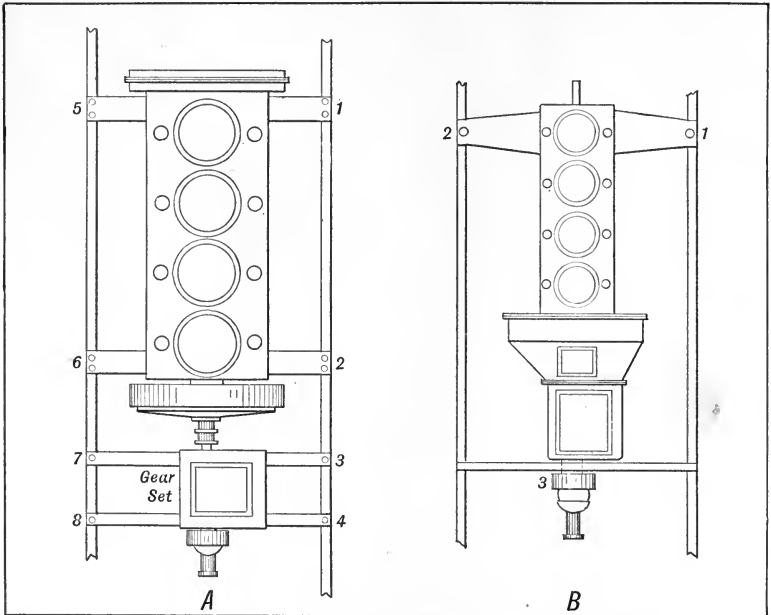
Defining Advantages of Unit Power Plant Construction when Supported on Three Points.
